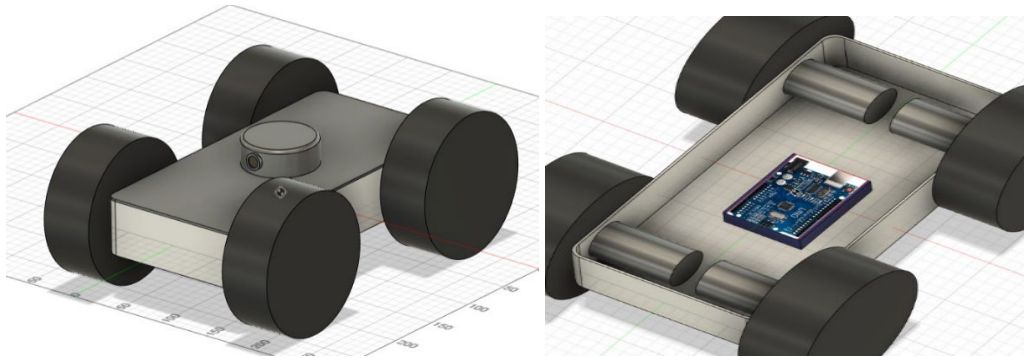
Preliminary Three-Dimensional CAD Model of the Robot Chassis Illustrating the Overall Geometry and Structural Layout
